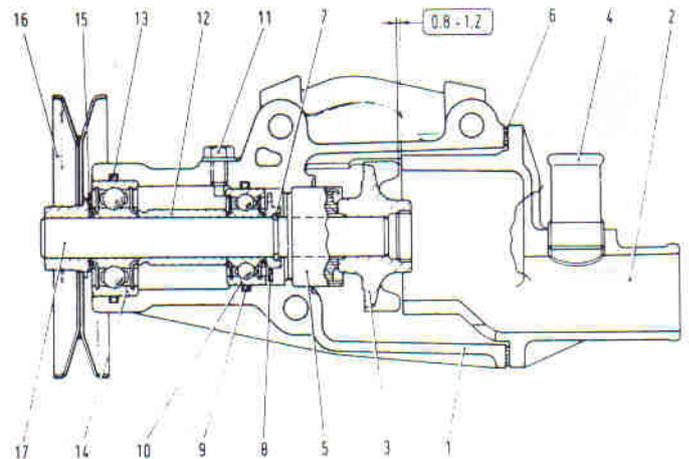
Sectional view of coolant pump on OHV engines (Sec 10)
